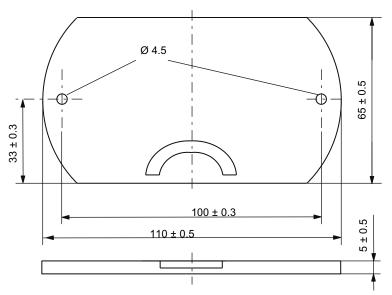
Fixing pocket 6GT2390-0AA00 for MDS D100
